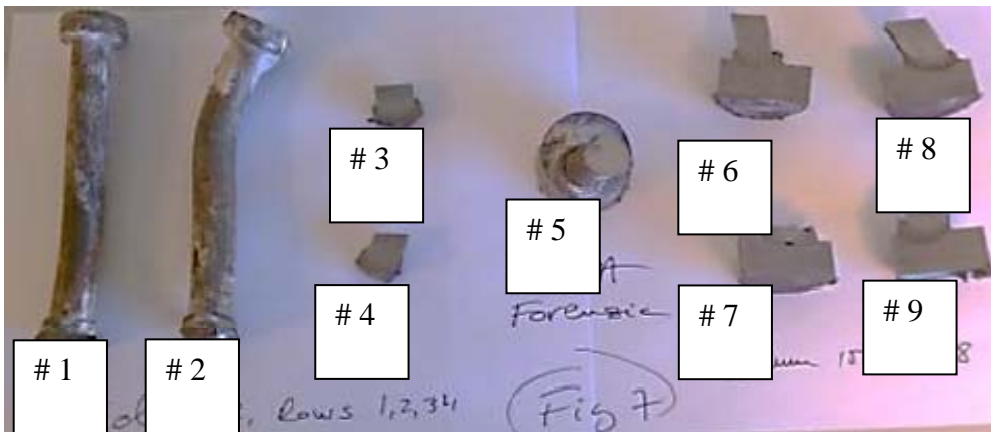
View of the 3/4” studs, core and fracture surfaces received, showing the LETU ID#.
